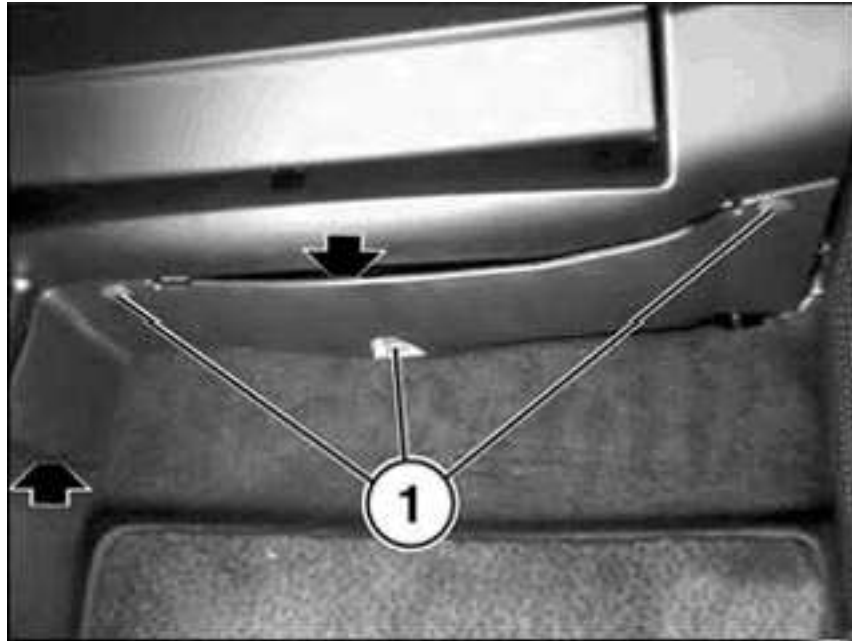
Figure X. Location of 1/4 turn fasteners on passenger footwell trim panel. Driver's side is similar.
